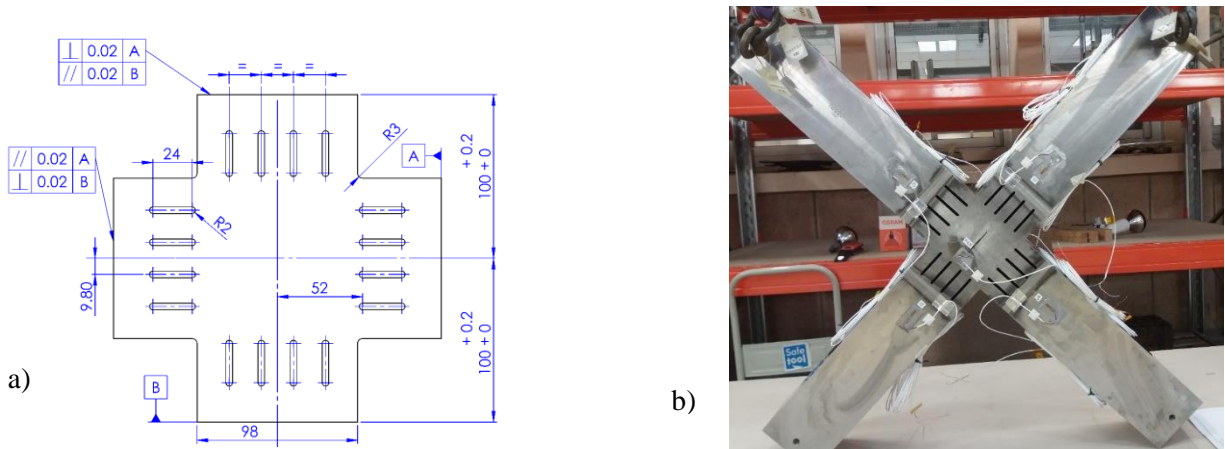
Cruciform specimen with a 98 mm thickness: a) core geometry of the specimen, b) whole specimen with its arms.
